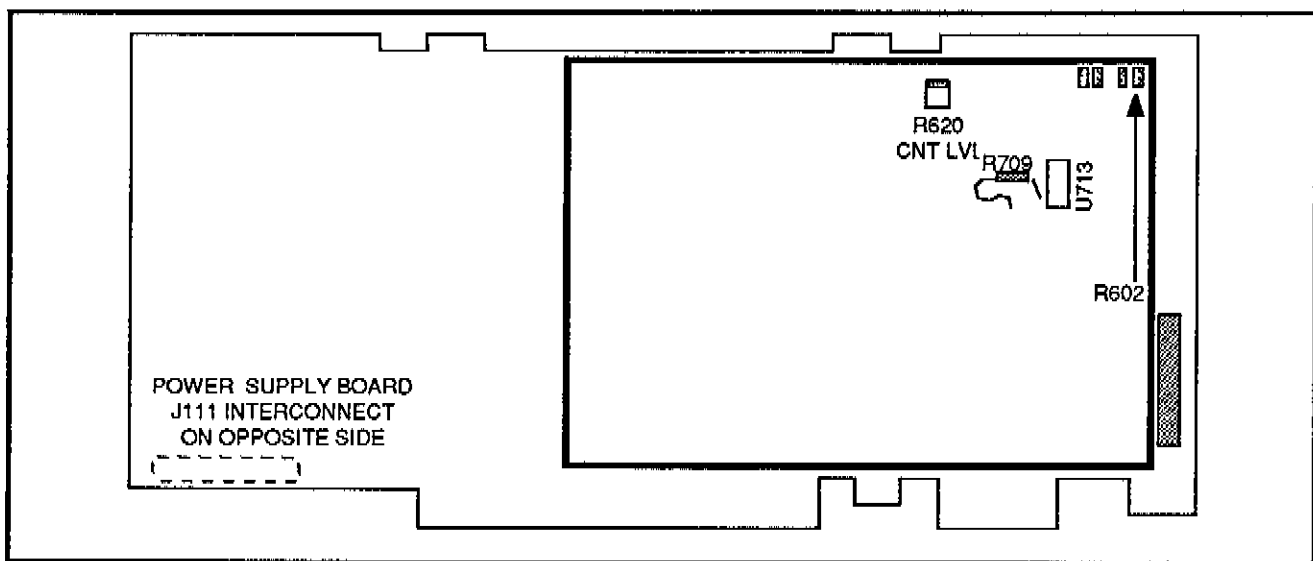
Location of R602 on the Phase Lock - CFC board.
